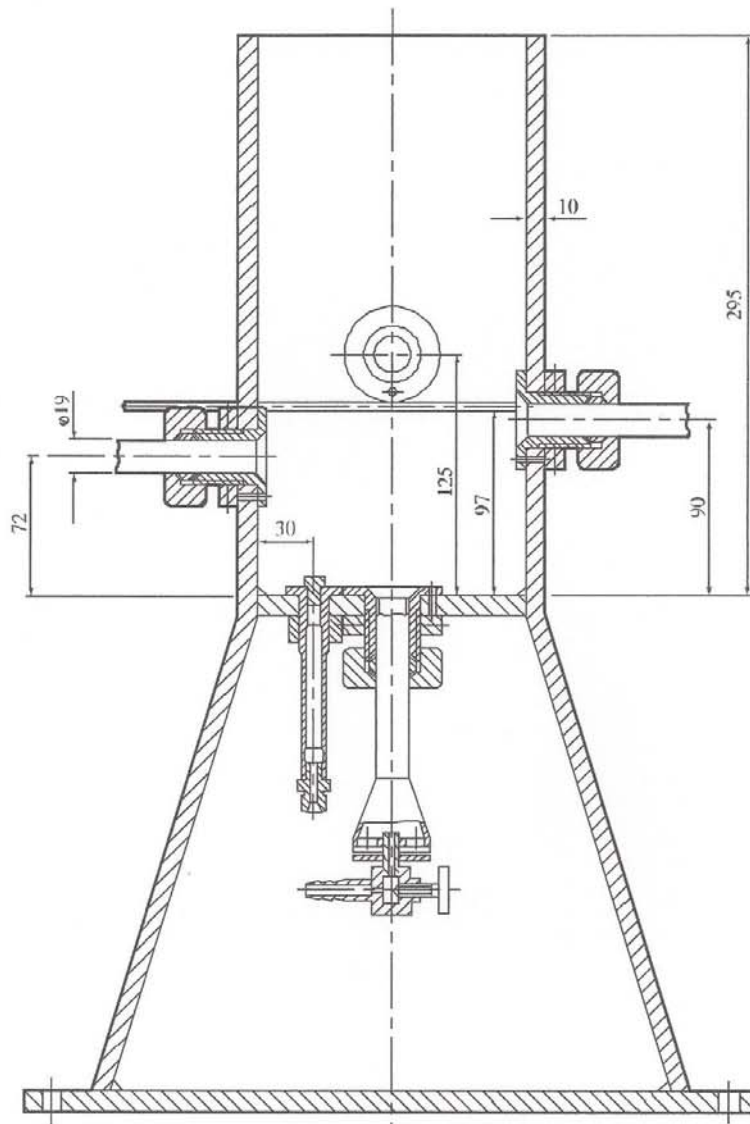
HEATING AND PROTECTIVE DEVICE
